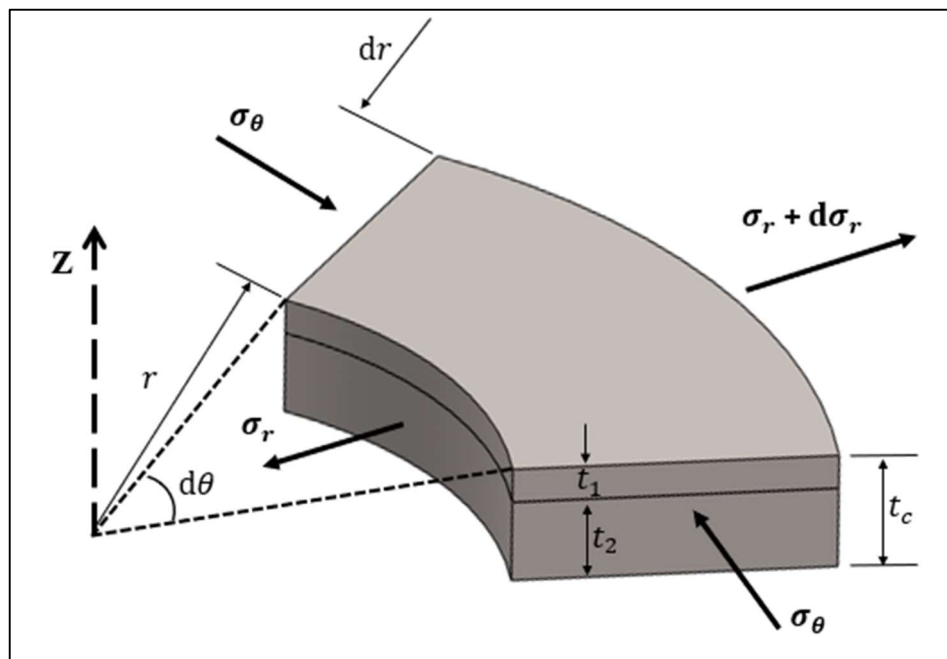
Radial element in the flange region of the sheet during deep drawing
